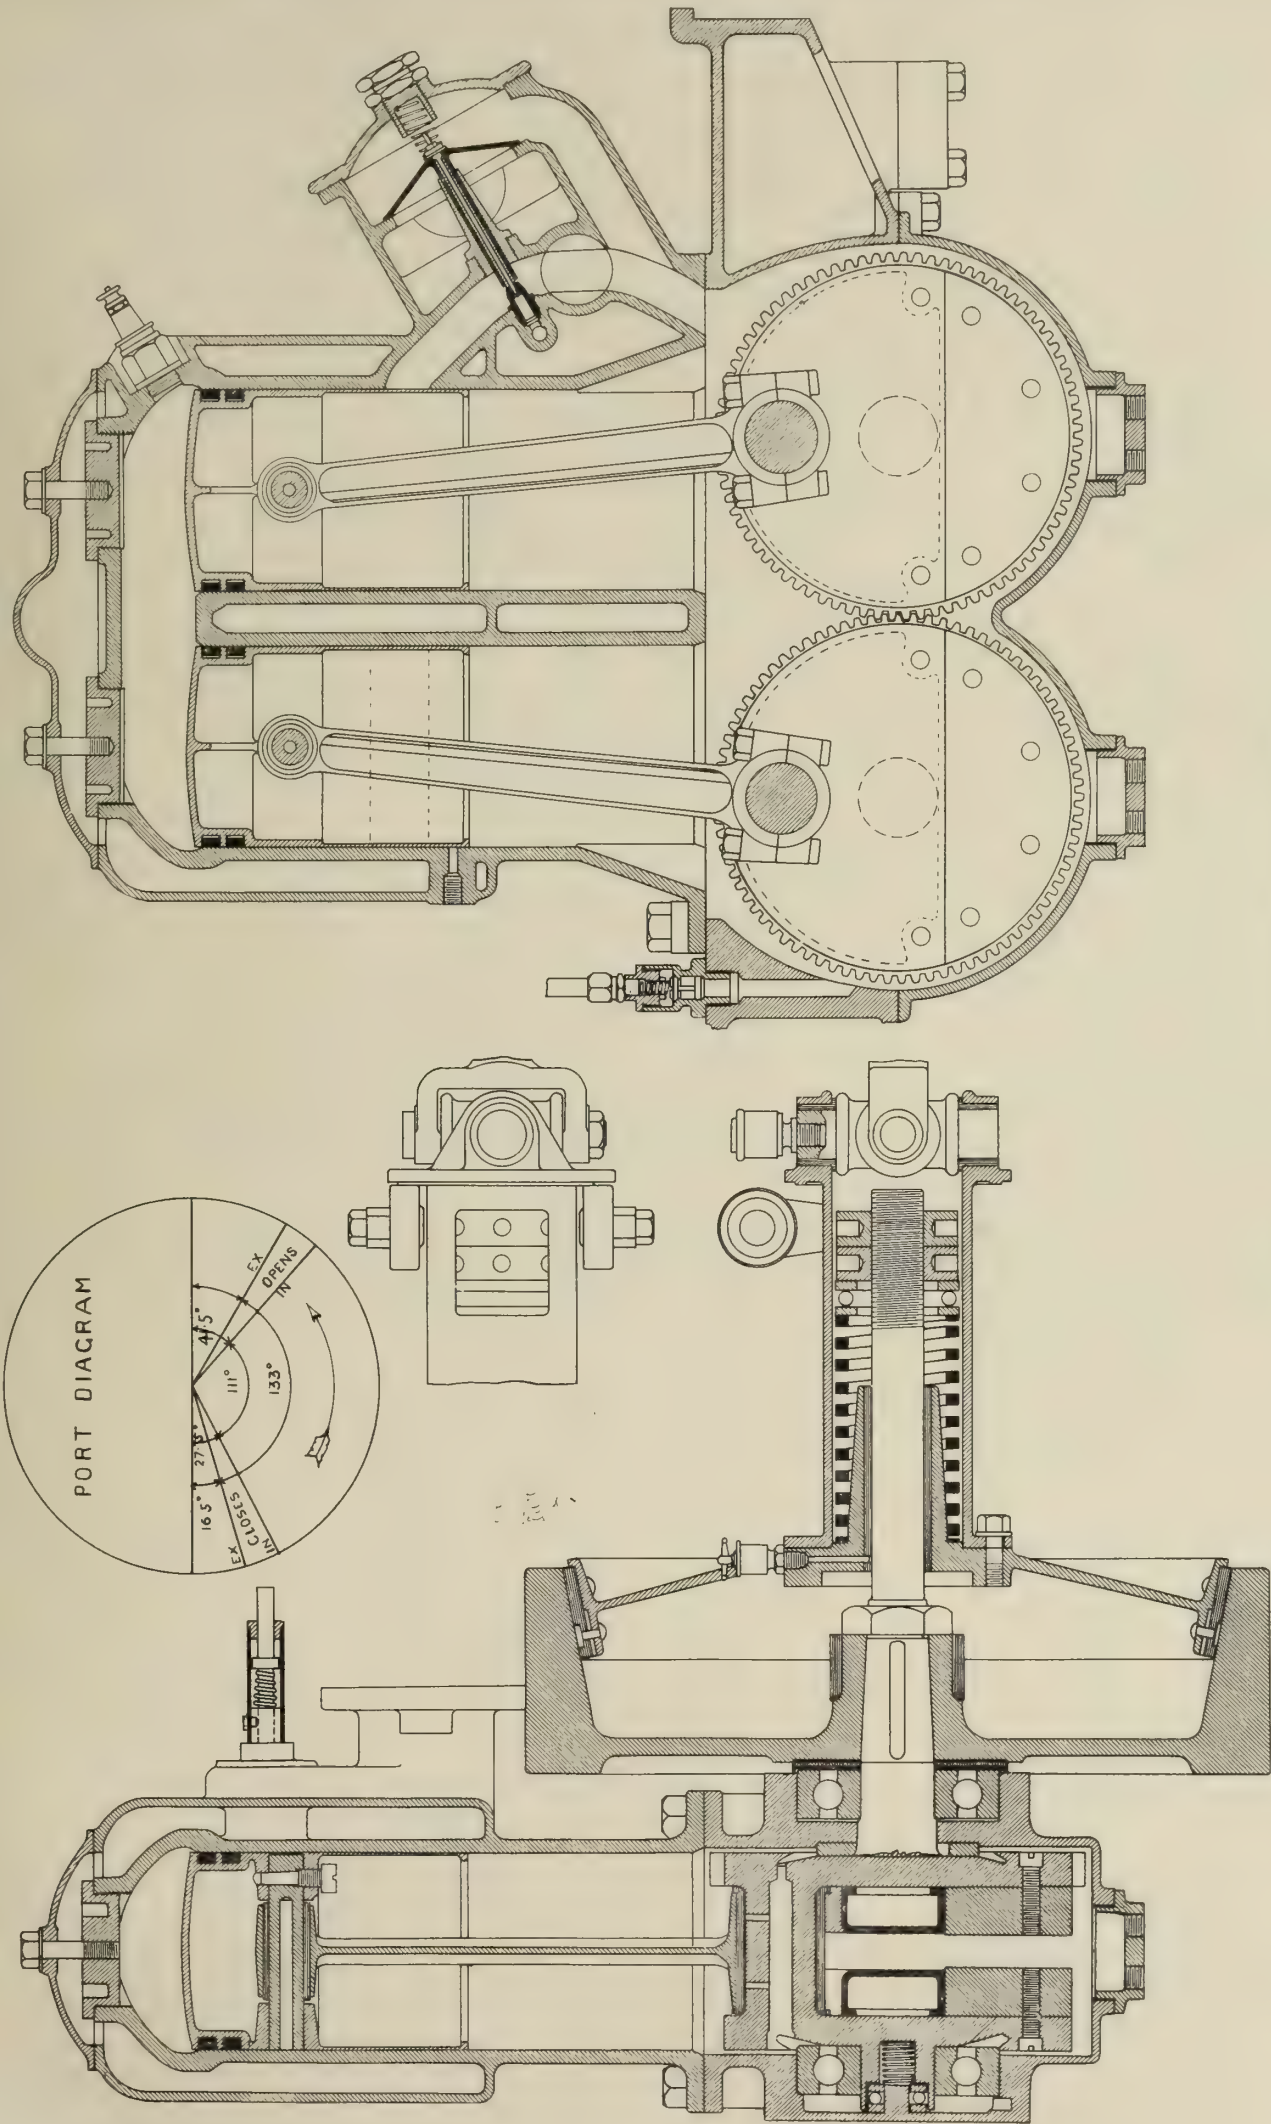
H.P. VALVELESS ENGINE.
